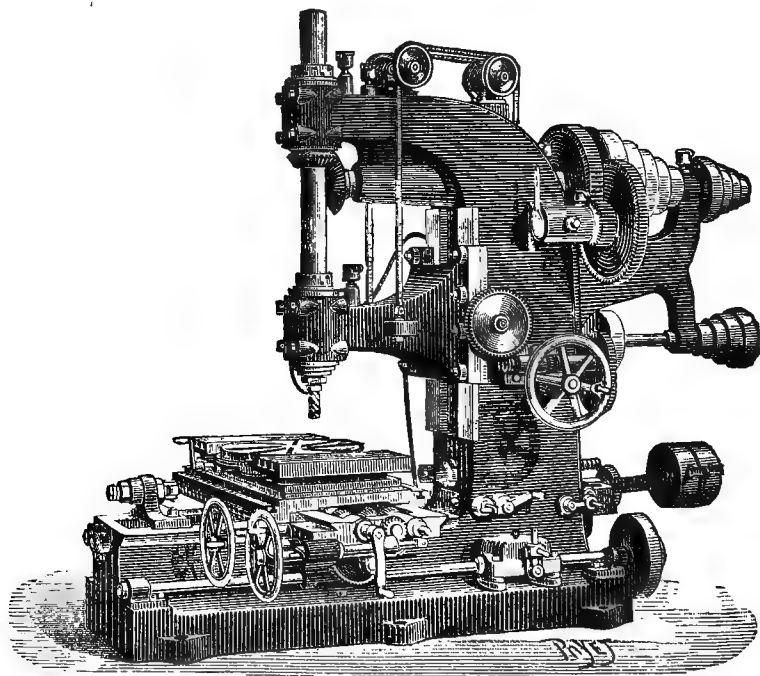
Vertical spindle milling machine by the Société Alsacienne.
